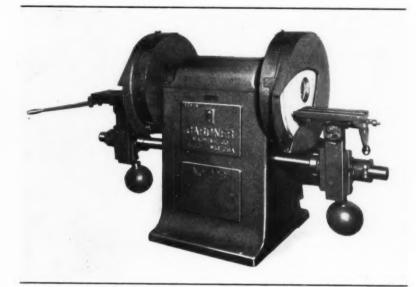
Gardner Single-spindle Disk Grinder Driven by Standard Motor
